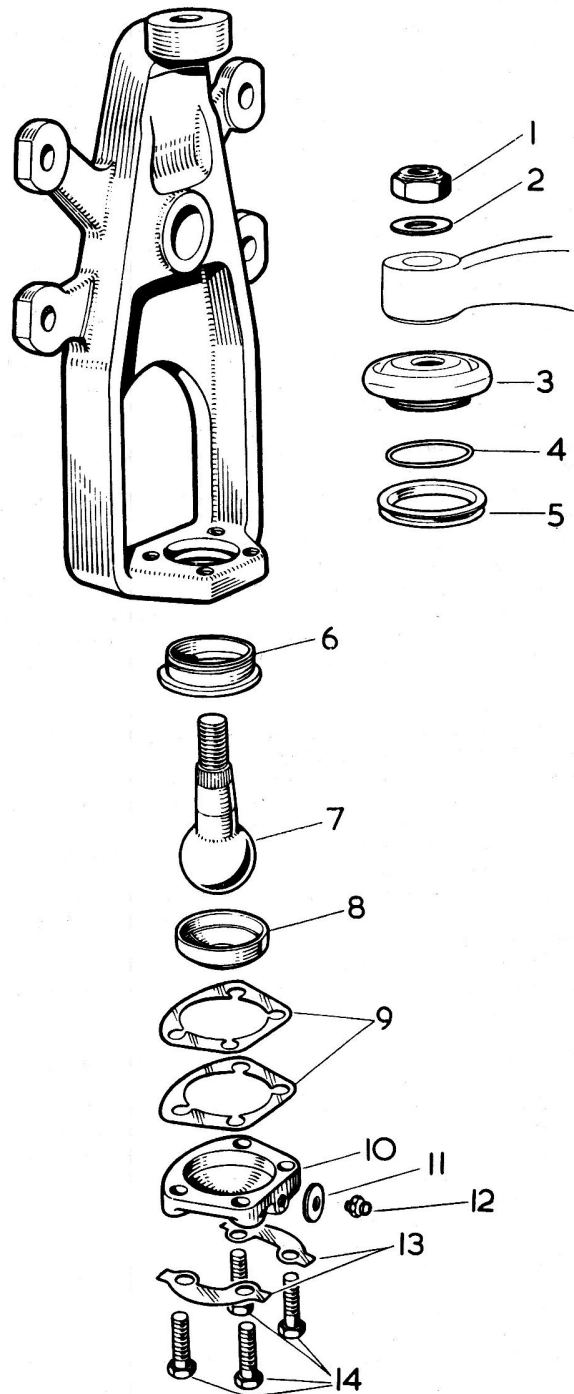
THE STUB AXLE CARRIER & LOWER WISHBONE BALL JOINT
